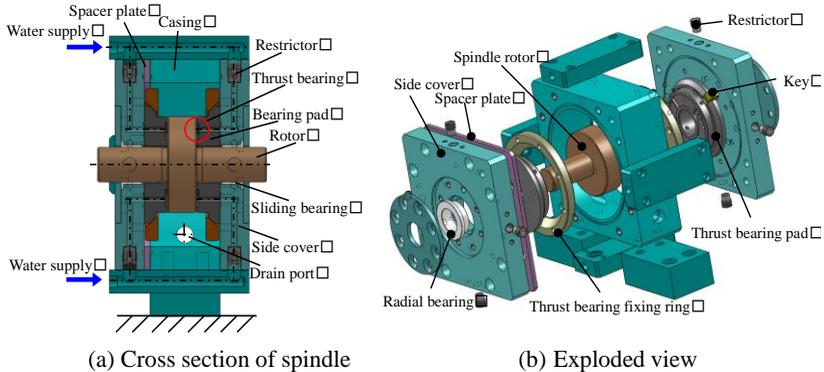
Structure of designed spindle with water hydrostatic thrust bearings
